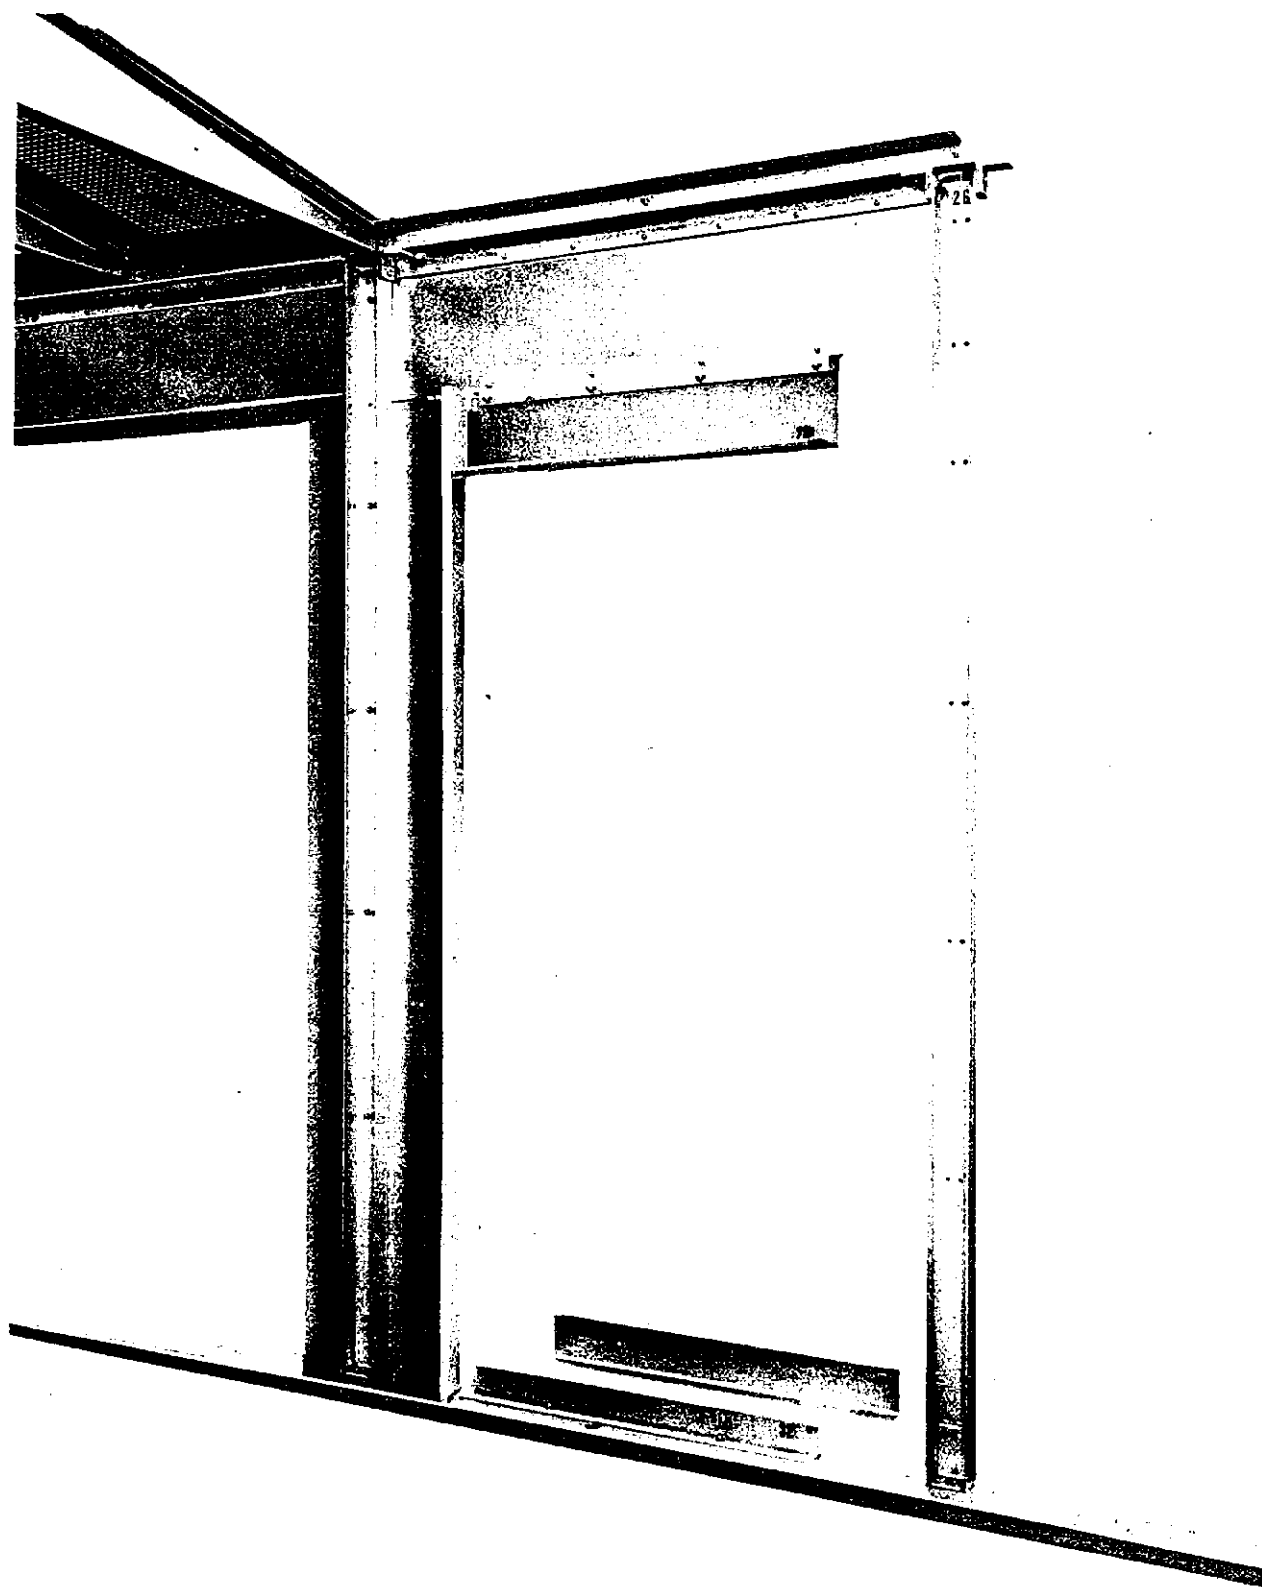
Enclosure, Partial Assembly, Control Panel, Inside View
